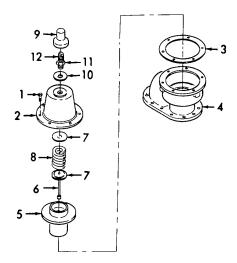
Pressure Relief Valve, Disassembly/Reassembly.
